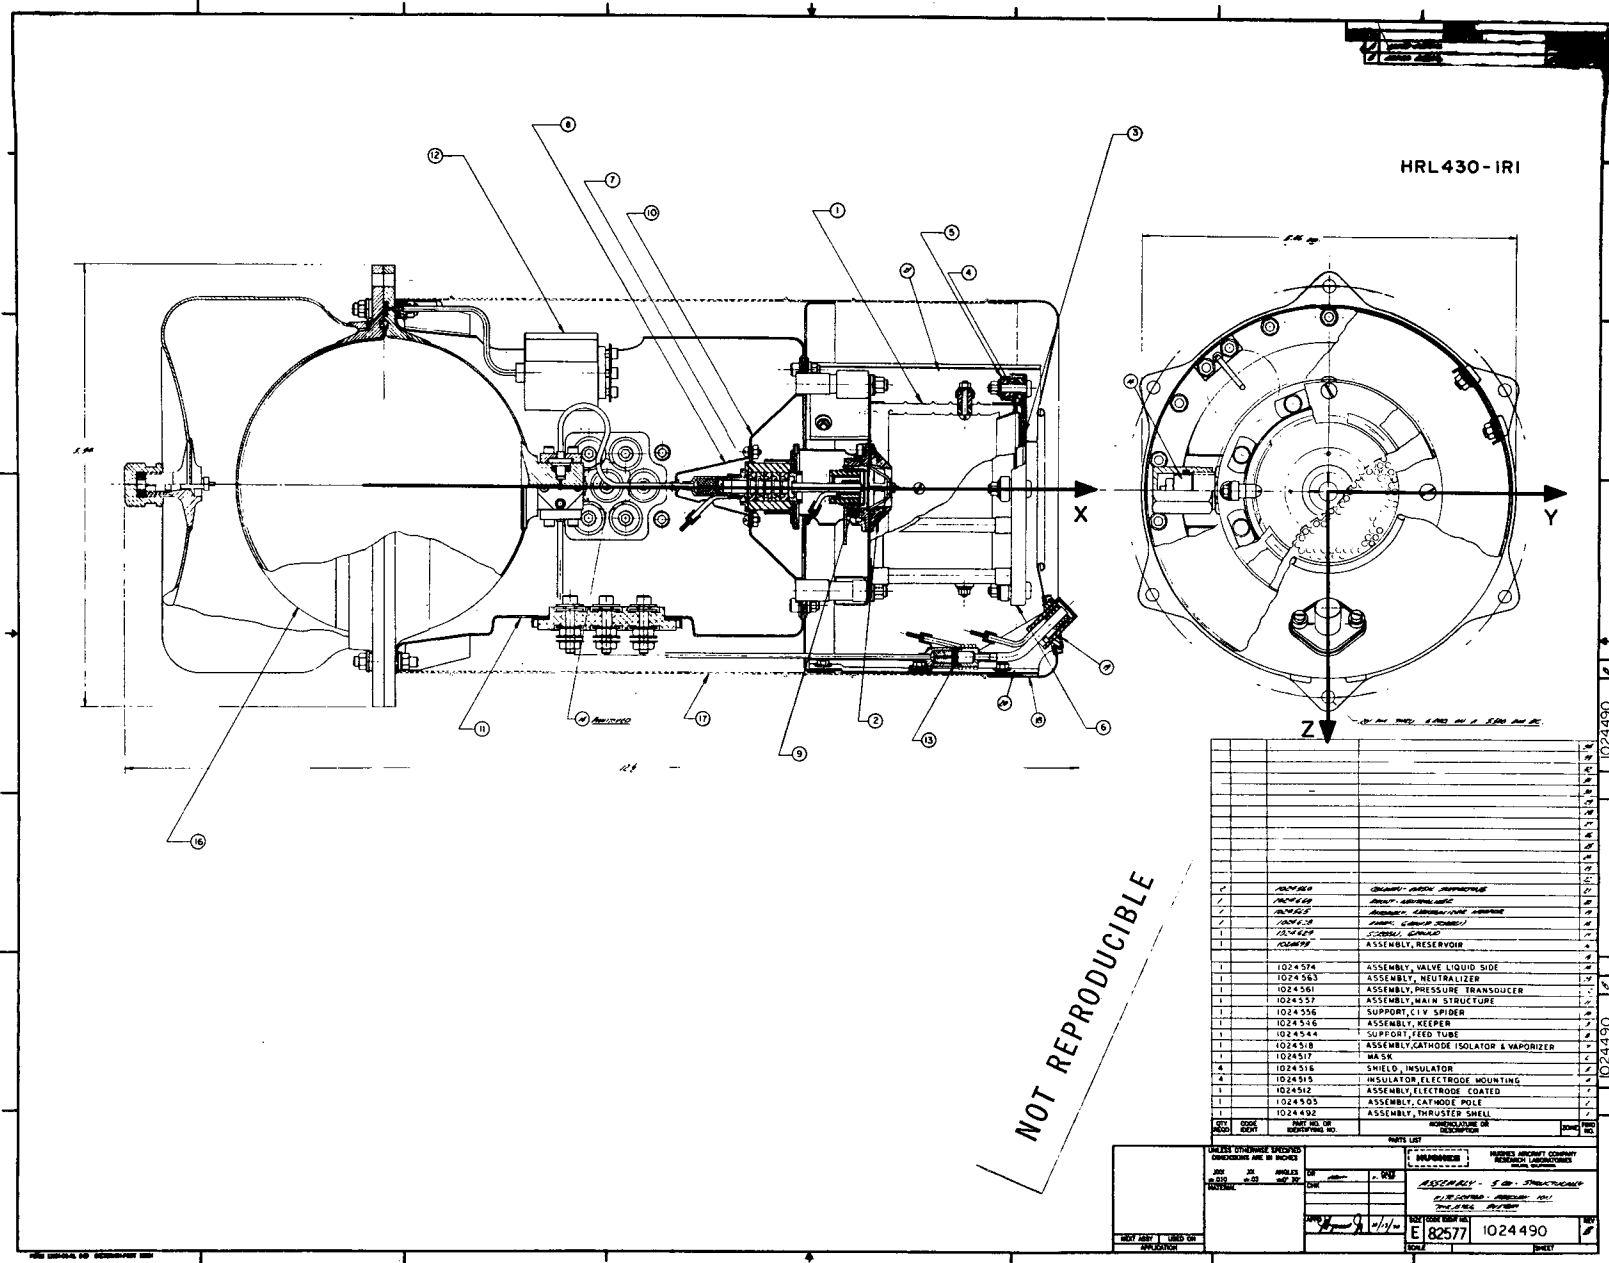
Preshake Engineering Drawing of the SIT-5 System.
